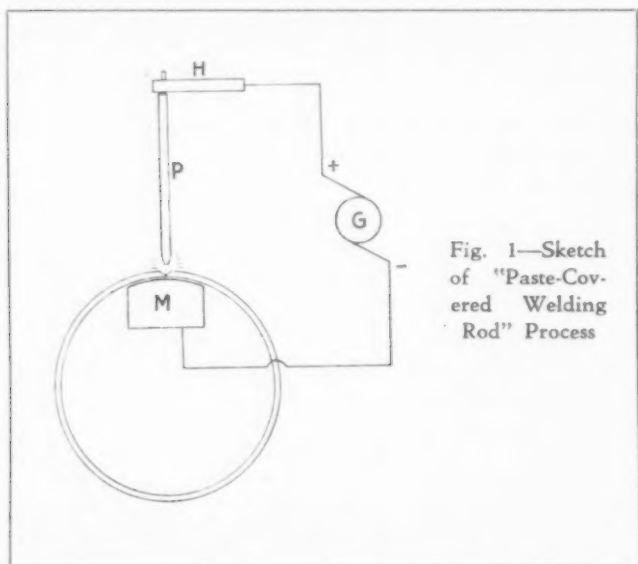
Sketch of "Paste-Covered Welding Rod" Process
